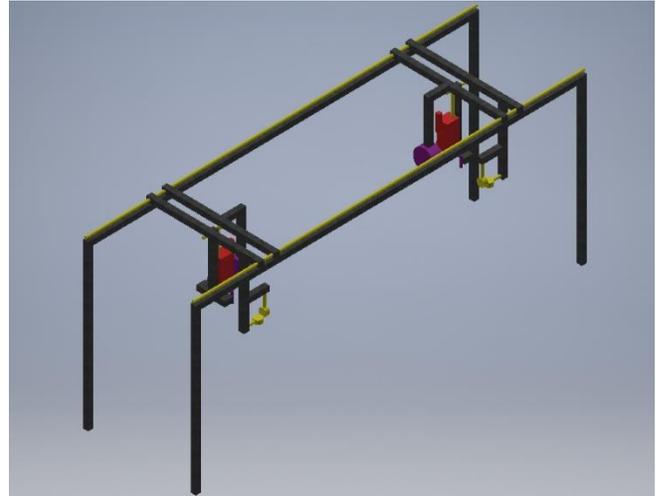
PROPOSED DESIGN FOR FINAL DEVICE ASSEMBLY
